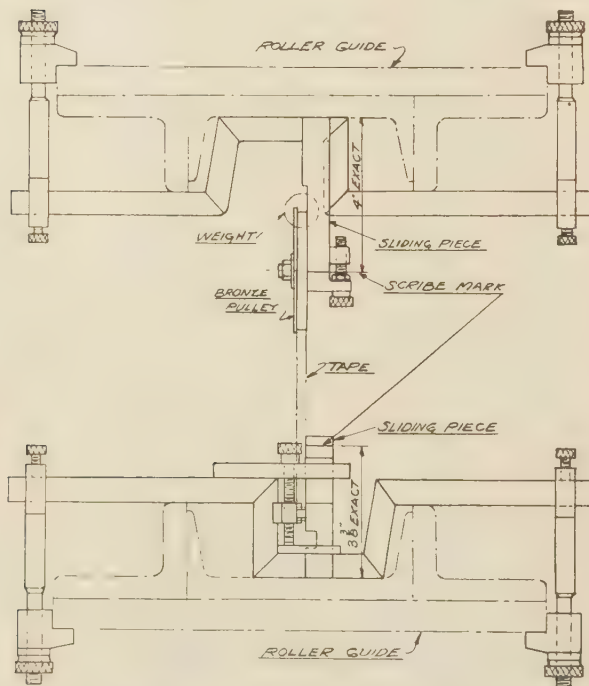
MEASURING ATTACHMENTS FOR END ROLLER GUIDES
